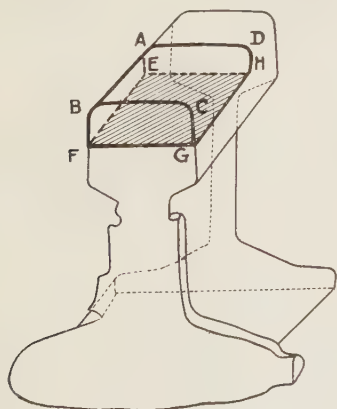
Diagram of part of the weld of which figure D. 34 is the X-ray photograph.
